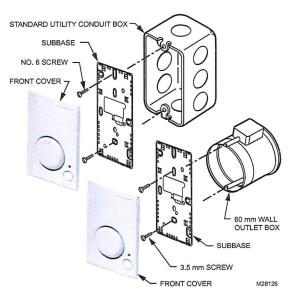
Mounting on Standard Utility Conduit Box or 60 mm Wall Outlet Box (TR23 Shown).
